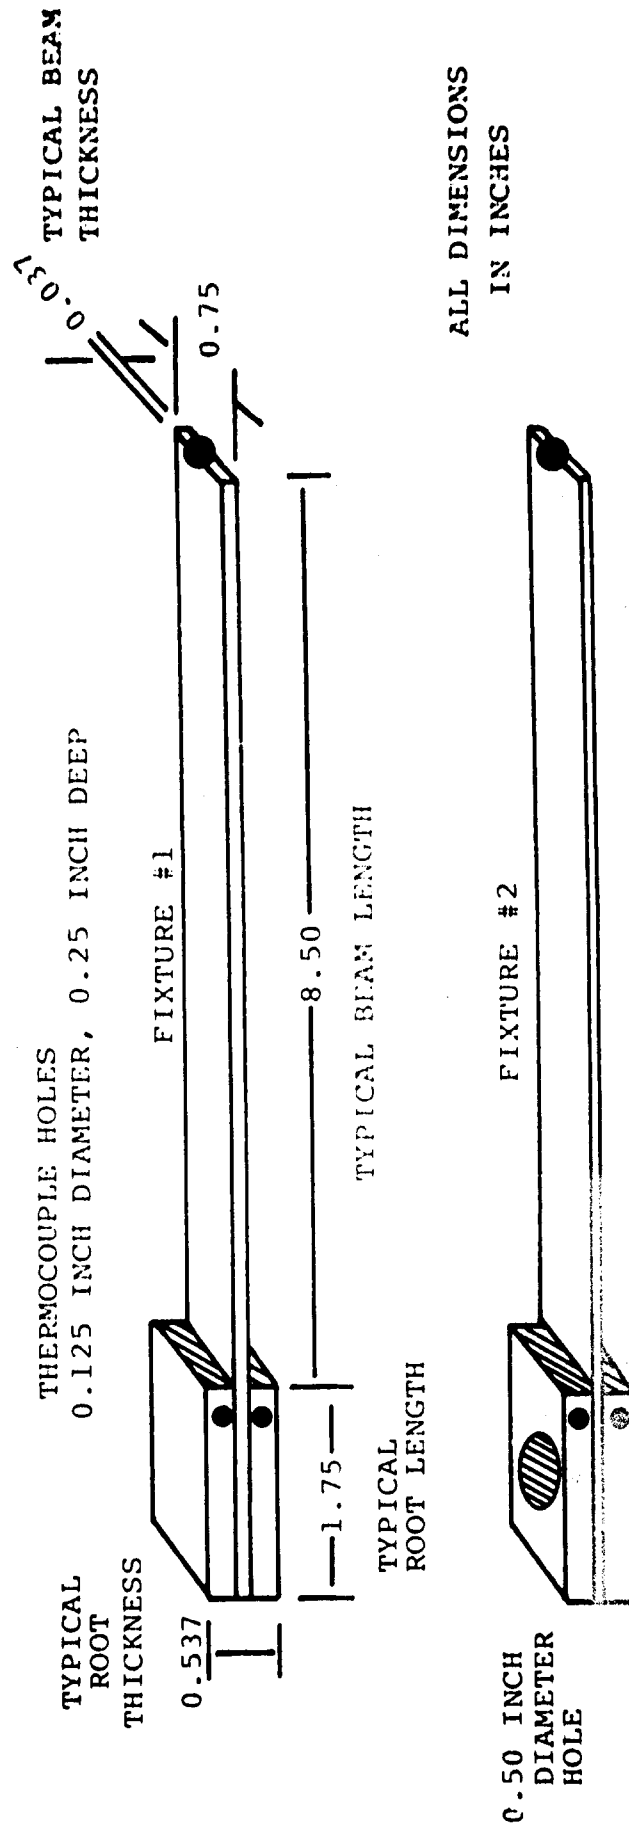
Schematic of the Cantilever Beam Test Specimens with Typical Dimensions.
